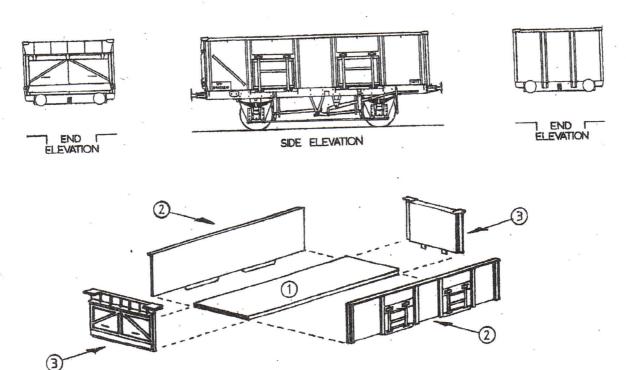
EXPLODED VIEW OF MODEL INDICATING THE FIT OF PARTS
